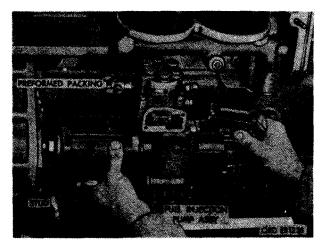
INSTALLING FUEL INJECTION PUMP ASSEMBLY.
